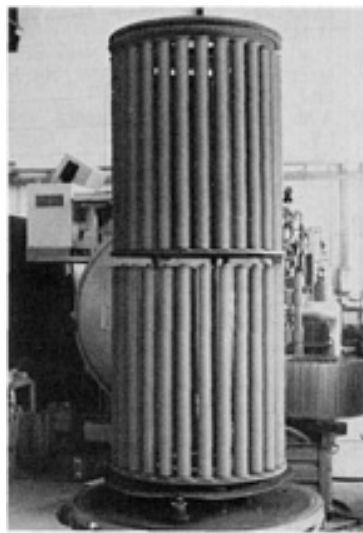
Load of approximately 4500 P/M steel chain gear wheels after plasma nitrocarburizing. Source: Klockner IONON GmbH and Ref 56
